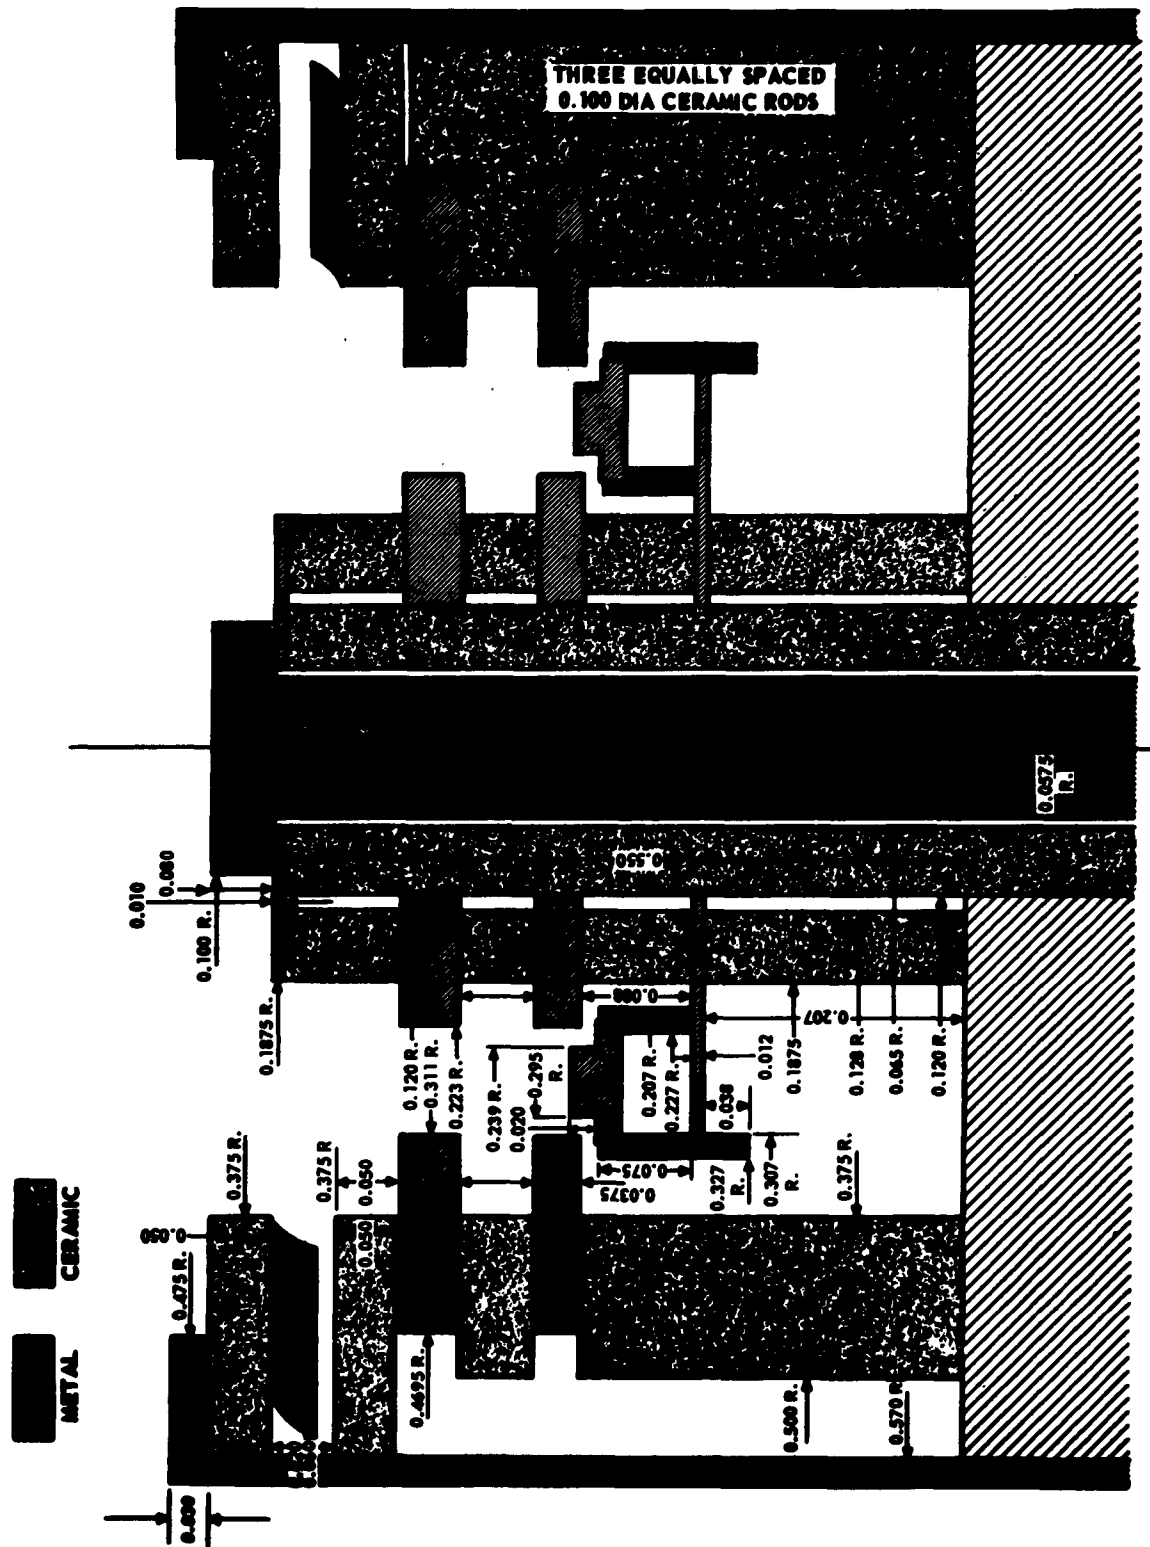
DETAILED ASSEMBLY DRAWING OF GUN.
